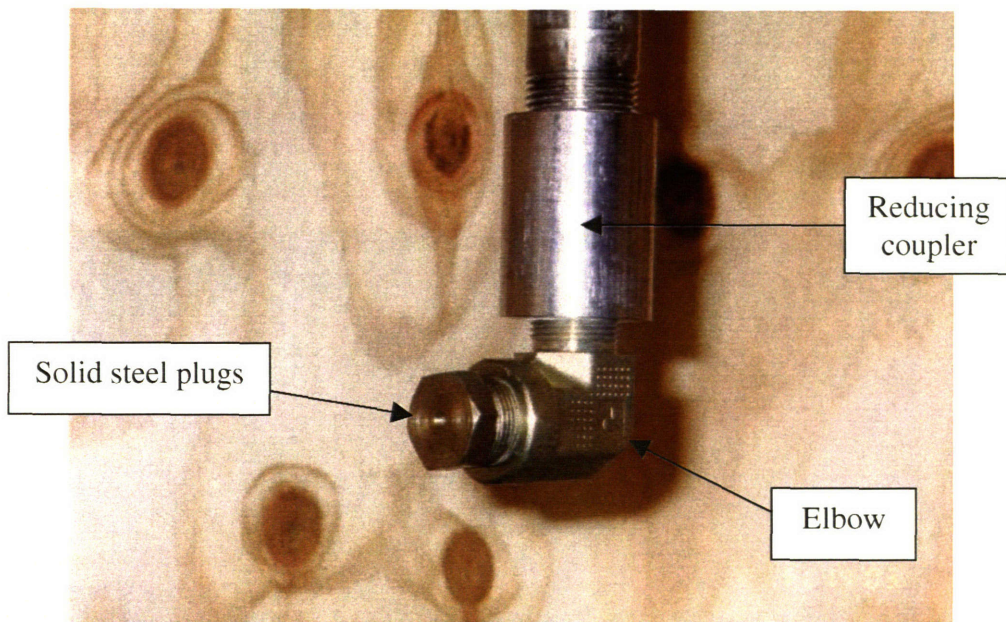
High pressure stainless steel hexagonal solid plugs forming nozzle
